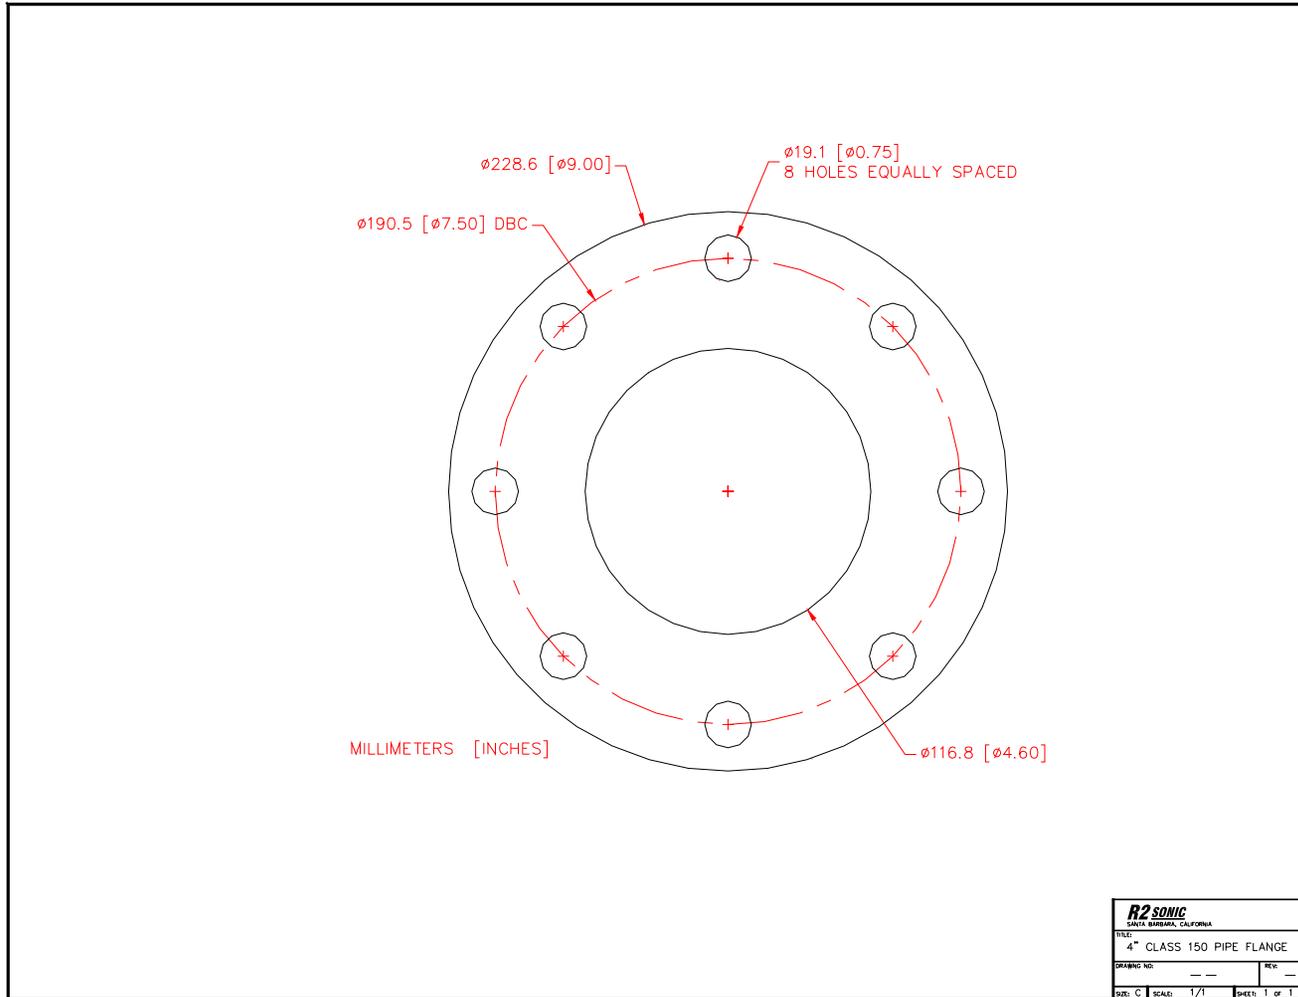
Sonic 2024/2022 Mounting Bracket Flange
